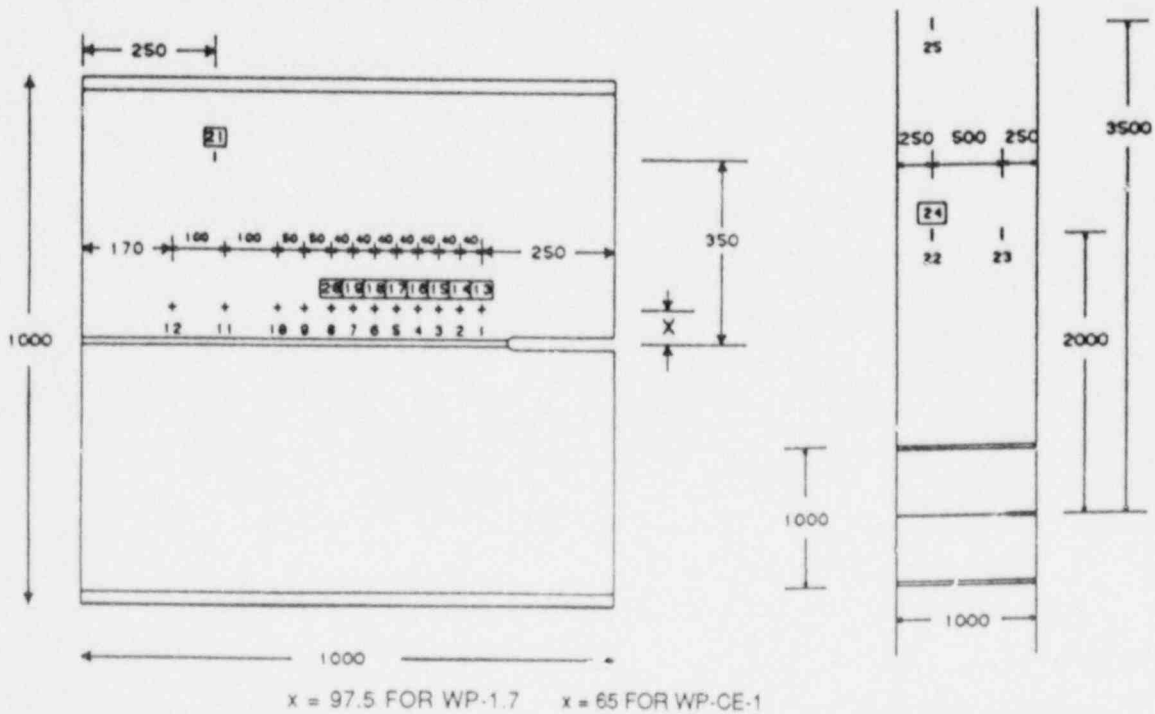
Thermocouple locations for wide-plate crack-arrest specimens. (a) Specimen WP-2.5, (b) specimens WP-2.3, -1.7, and -CE-1.
